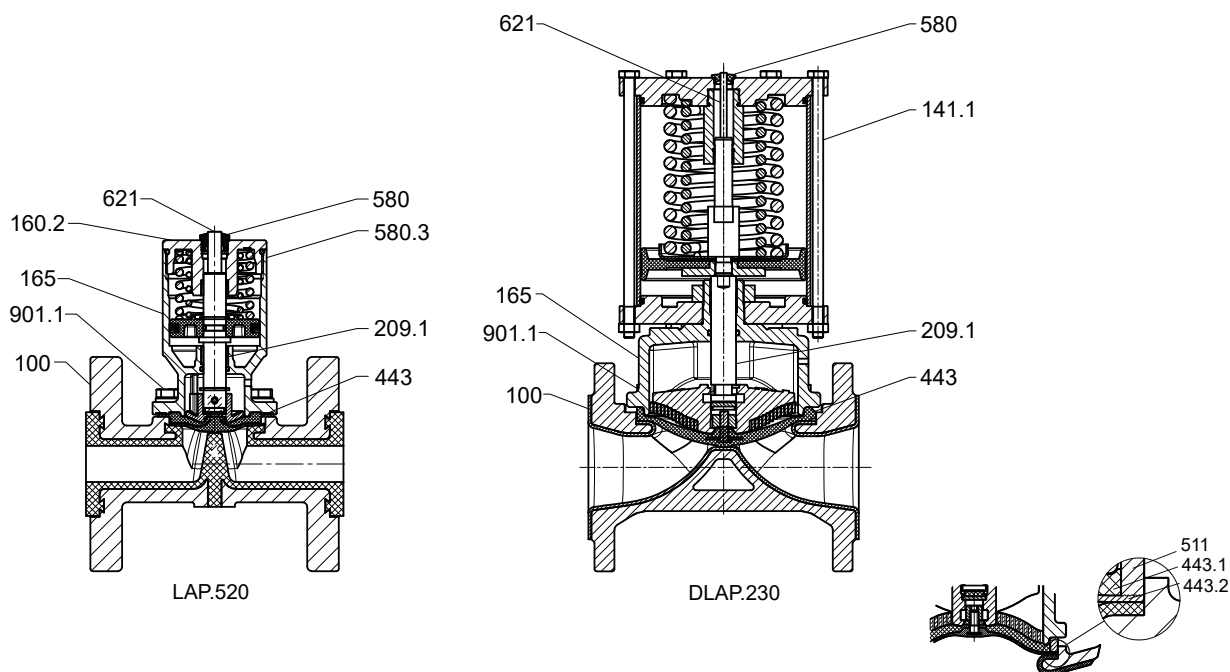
Directly mounted SISTO-LAP.520 and SISTO-DLAP.230 piston actuators
